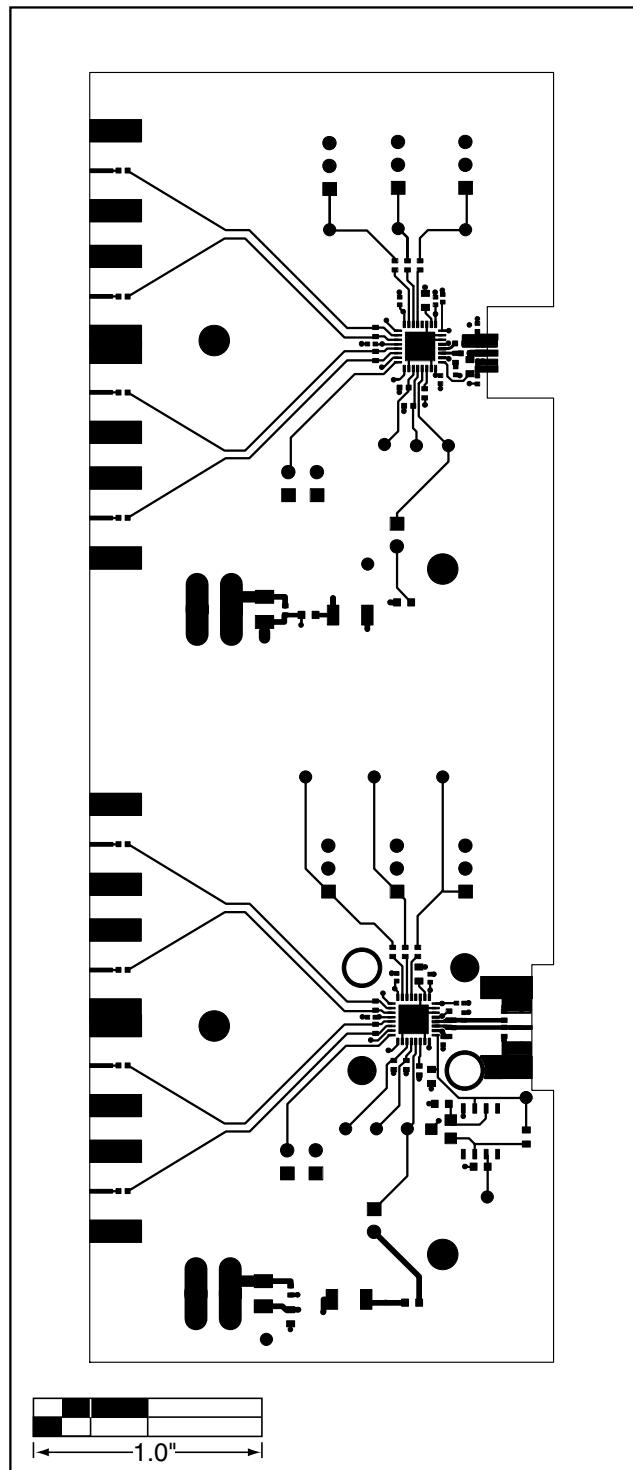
MAX3850 EV Kit PC Board Layout—Component Side
